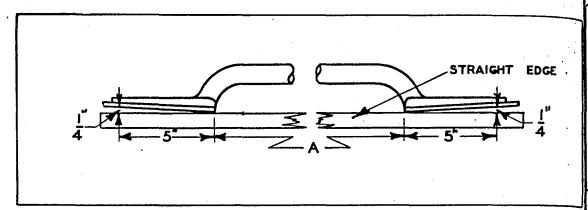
METHOD OF CHECKING AN ADZING GAUGE.
